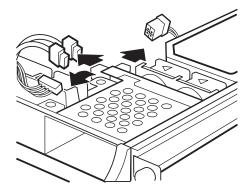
Disconnecting Cables From the SAS IF Assembly
